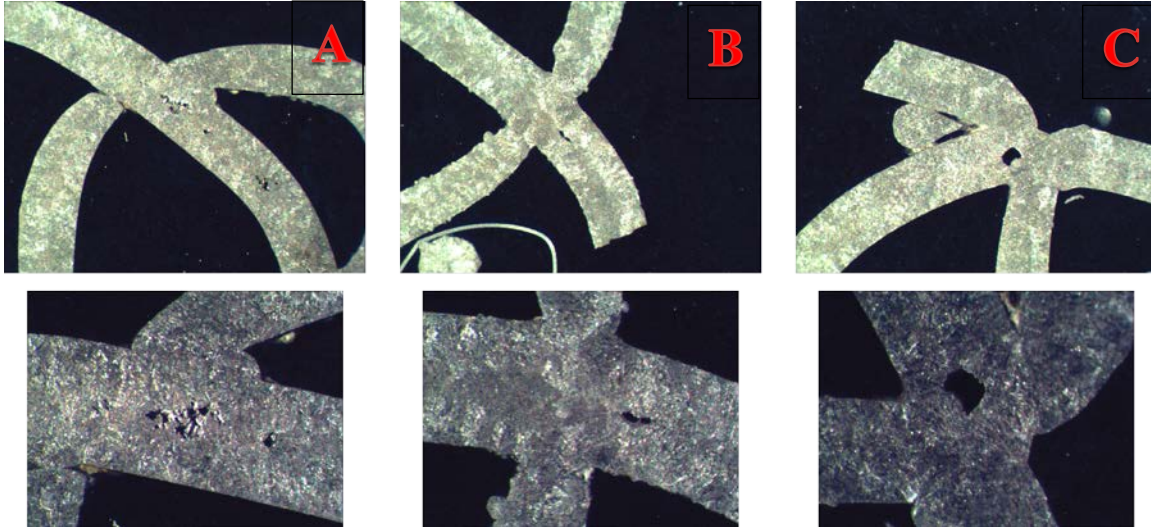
Casting results; (A) shows a pore that formed in the improved geometry silica mold, (B) shows a pore that formed in the alumina mold, (C) shows a pore that formed in the zirconia mold. The second line reflects the same pores at high magnification.
